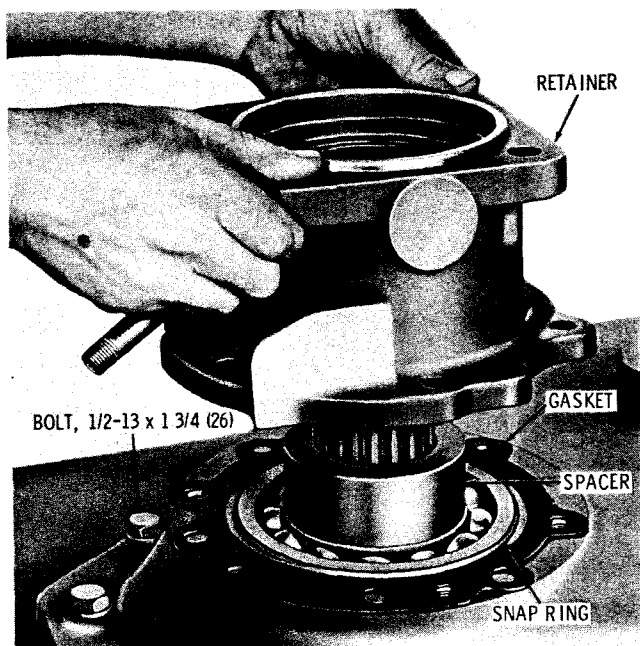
Installing rear bearing retainer (models with parking brake)
